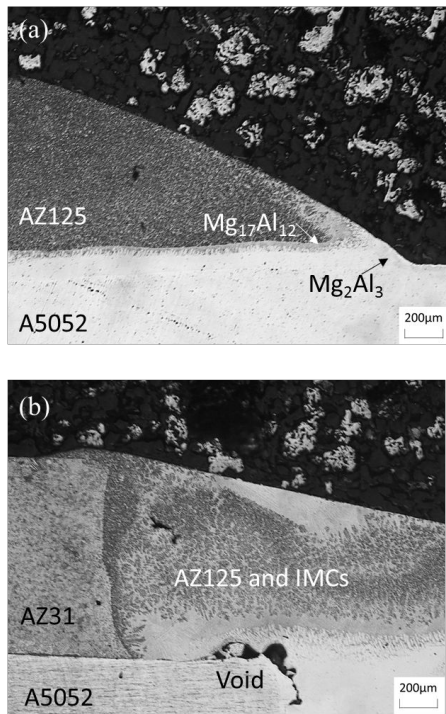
Macrostructure of cross section of the weld bead of the A5052/AZ31 laser brazed joints with (a) 520W and (b) 610W.
